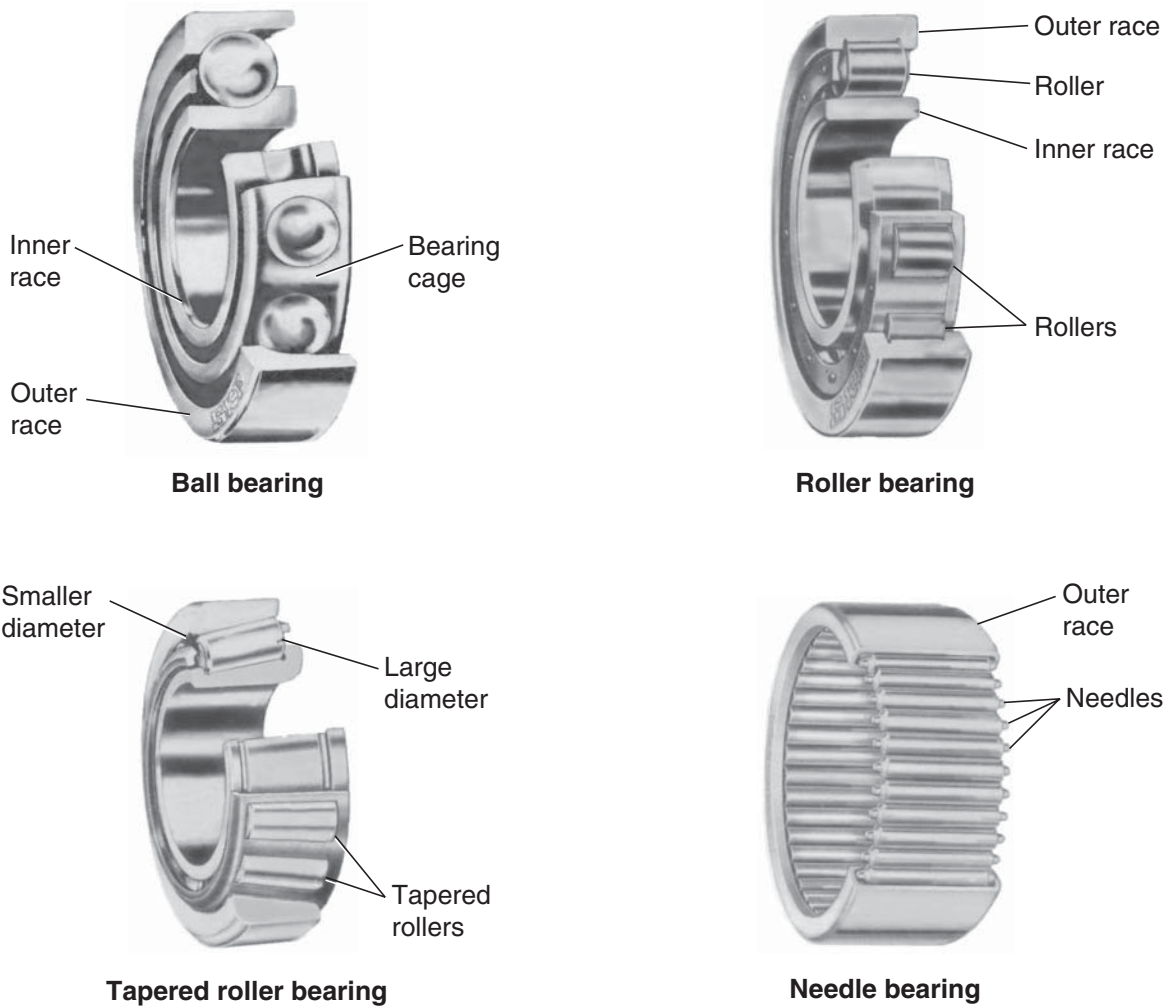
Different bearings commonly found in power equipment engines and their components.
